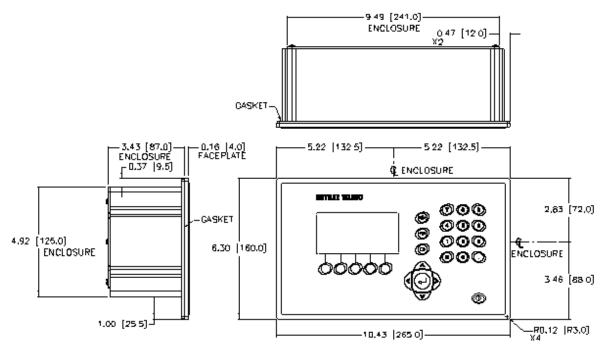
IND560x Panel-Mount Enclosure Dimensions
